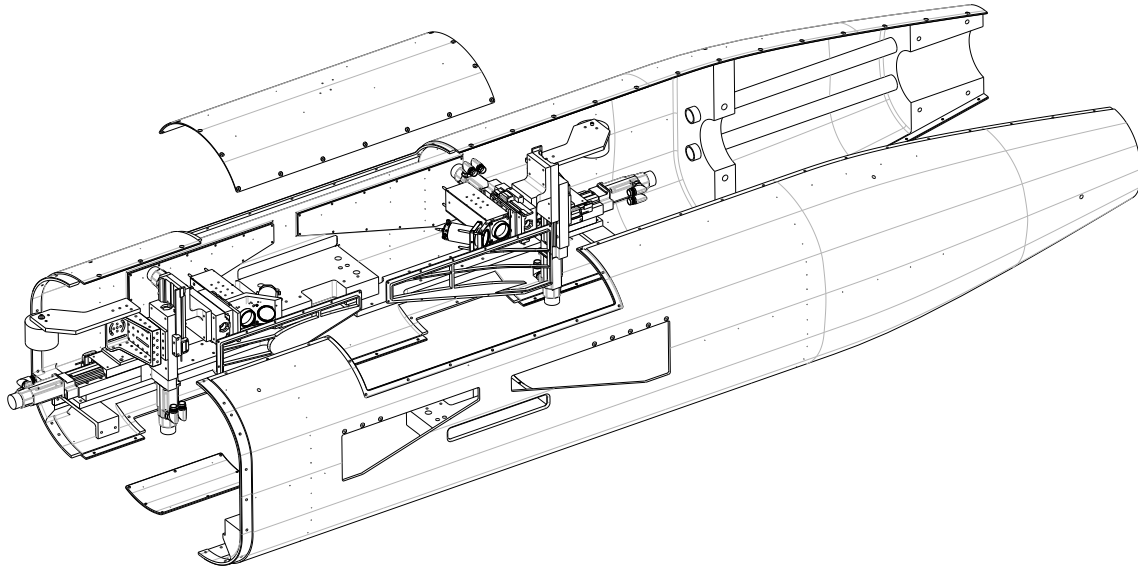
Exploded view of the fuselage main section assembly with LDV systems.
